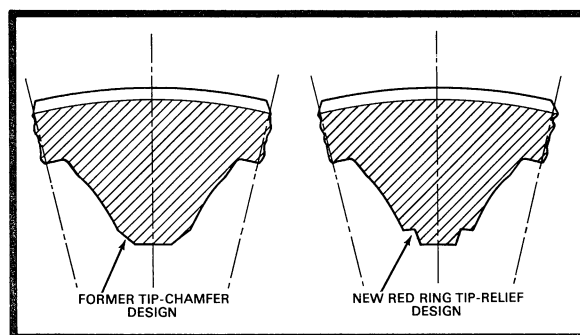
Conventional broached internal gear tip chamfer and improved tip relief, length-of-roll-control design.
